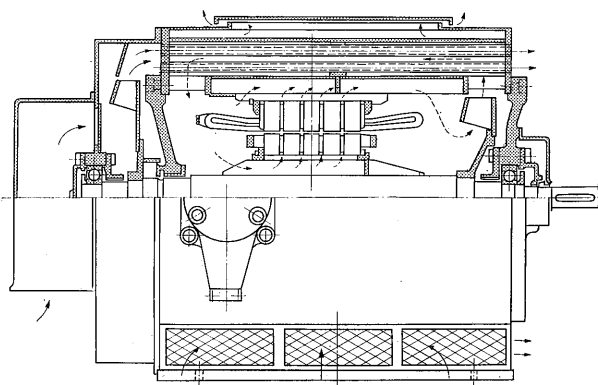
Section view of outdoor use air pipe cooled flame-proof induction motor
